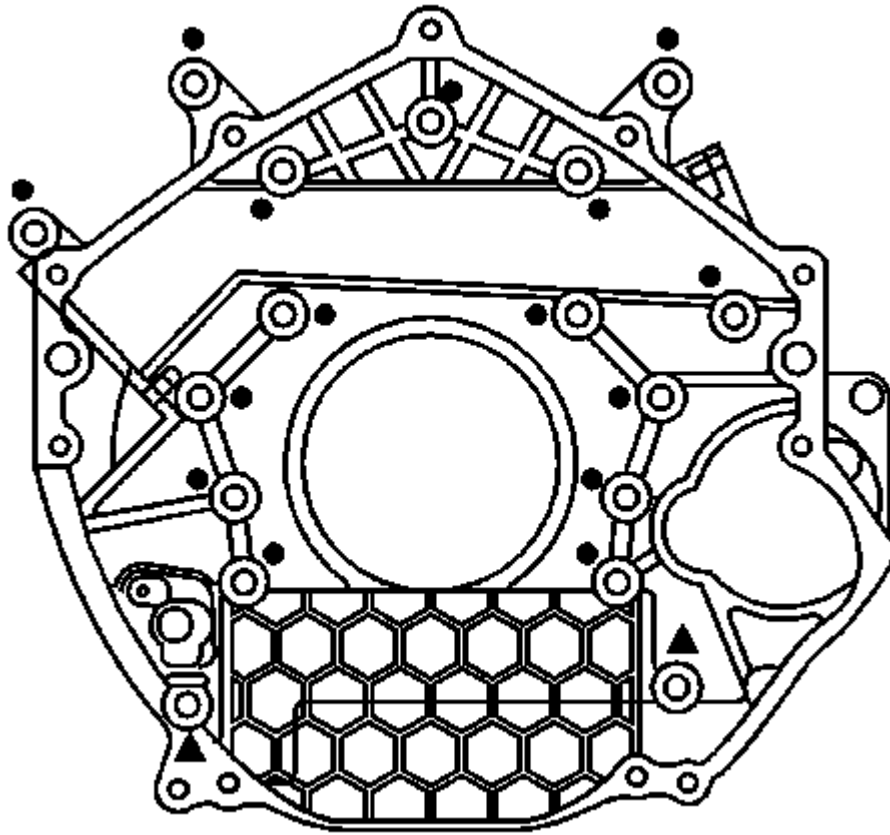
View Of Engine Rear Cover Bolts & Flywheel Housing To Upper Oil Pan Bolts
